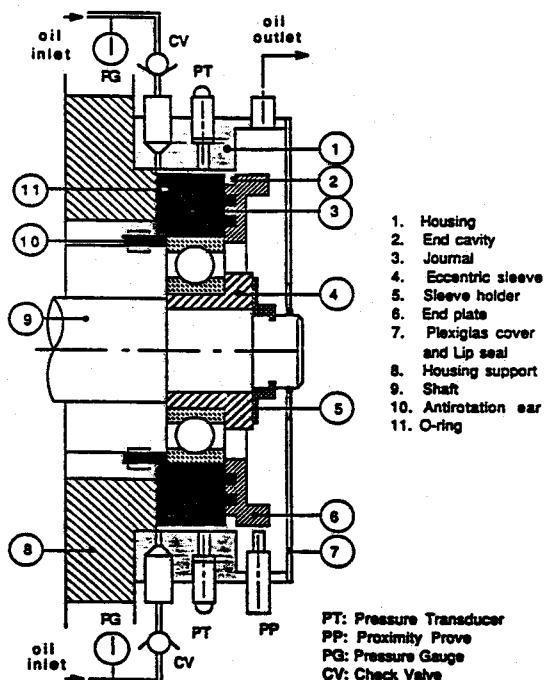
Section of TRC Squeeze Film Damper Test Rig.
